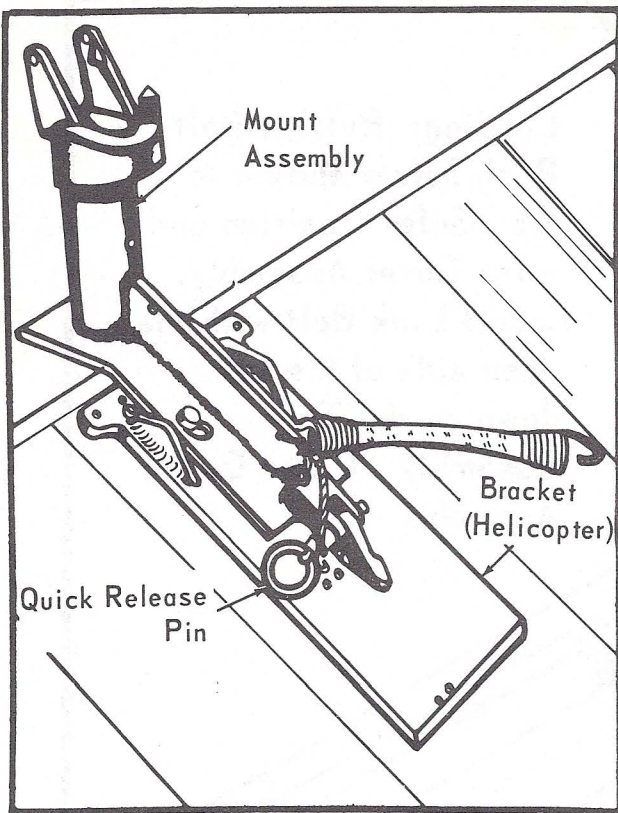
M41 Mount Assembly—Installed on Ramp
